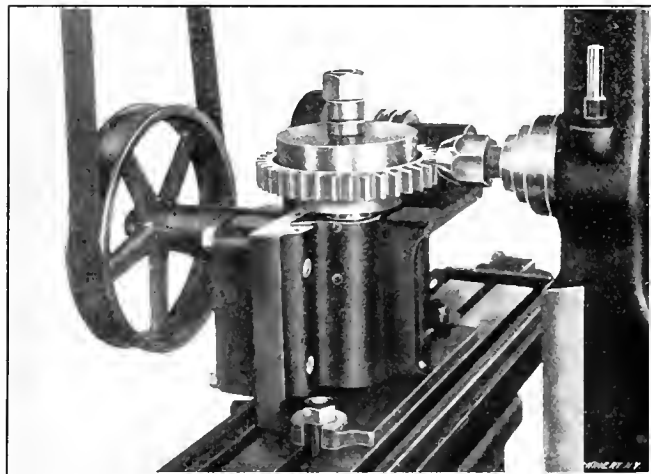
The "Long Arm" Automatic Gear Tooth Chamfering Attachment at Work.
